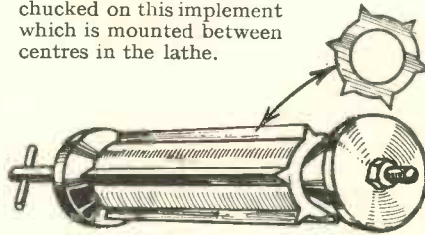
RIBBED FORMER MOUNTED ON MANDREL.
